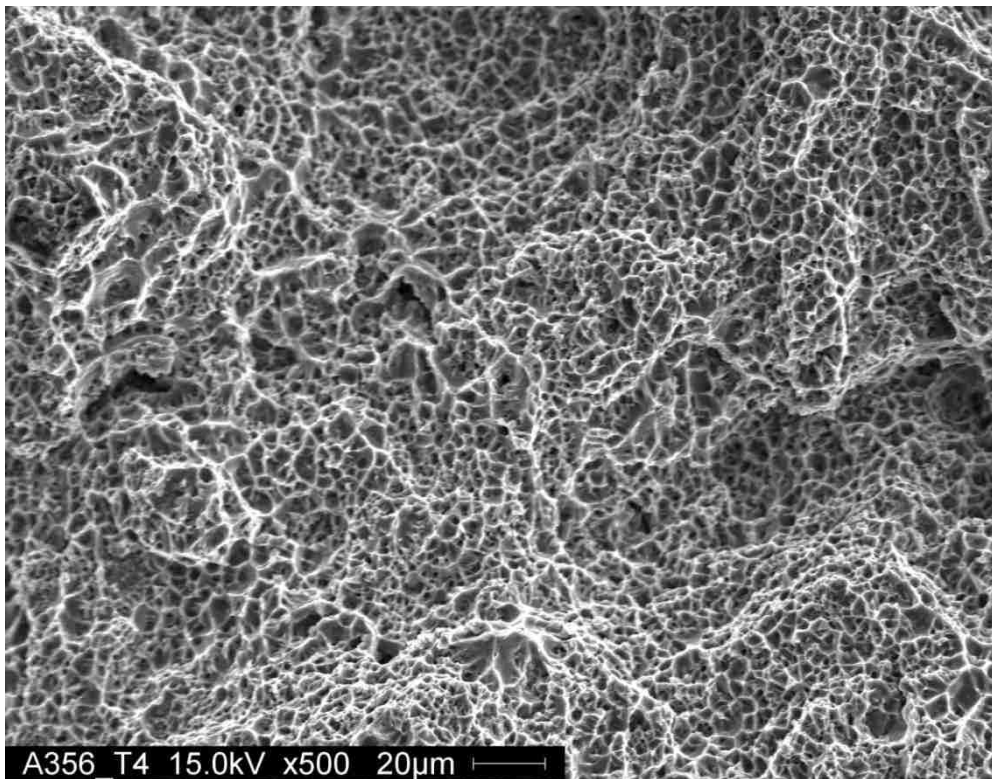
Fractograph of the tensile specimen of T4 welded cast alloy A356.
